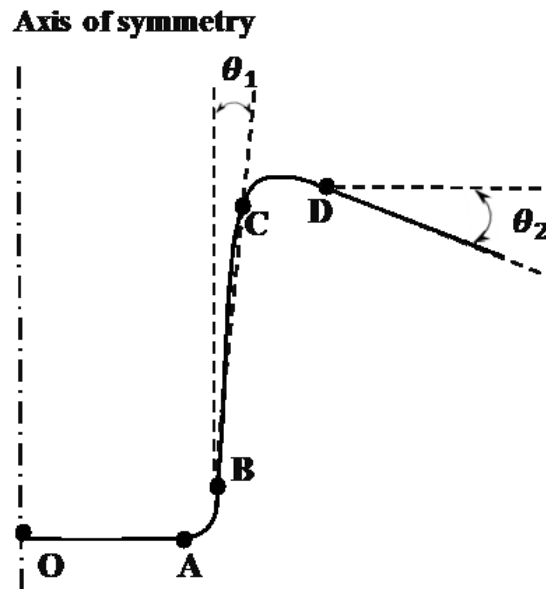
The springback angle θ_1 and θ_2 measurement of U-shaped formed components.
